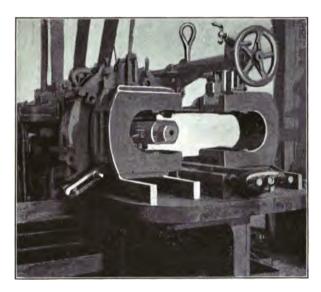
Planning driving boxes on a draw-cut shaper.
